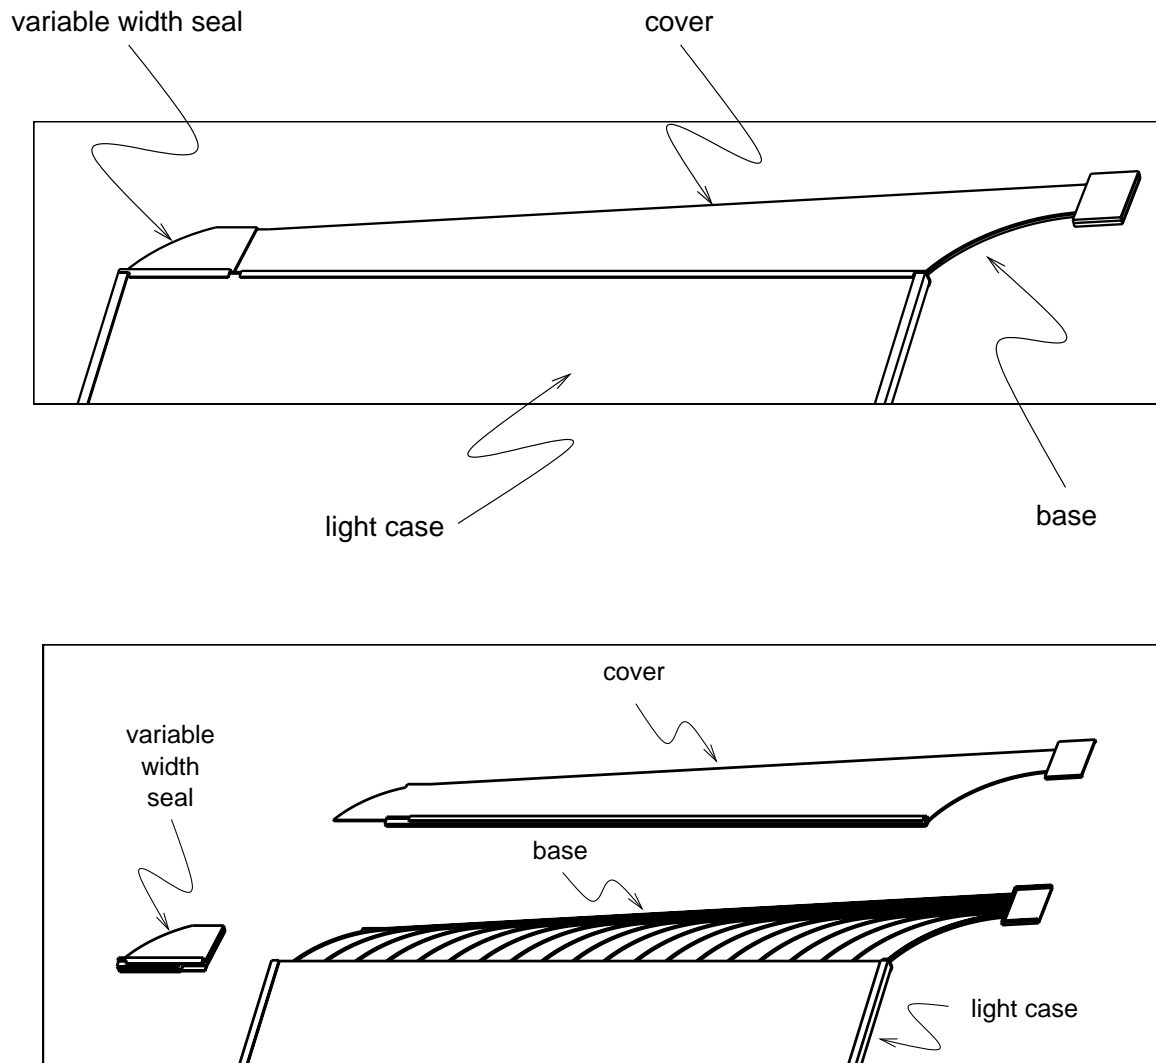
Sketches of a 20-wide perpendicular-ended manifold with a right-handed optical connector outlet. The upper drawing shows the assembled manifold and the lower drawing is an exploded view.
